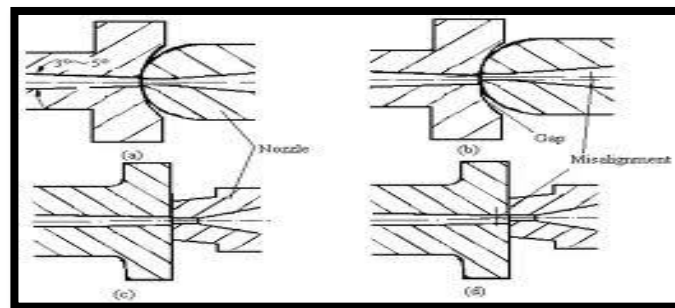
Two basic design of sprue bush, spherical recess and flat rear face
